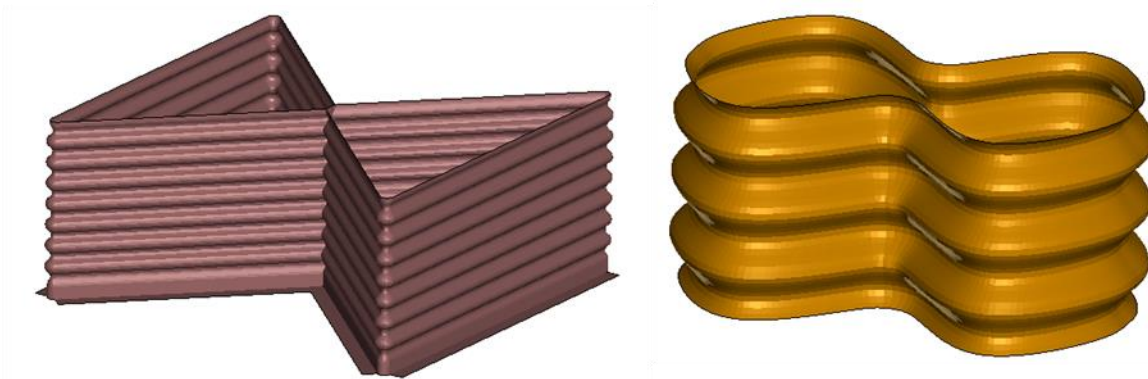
Schematic of SA subfloor design (left) and updated “infinity” subfloor design (right).
